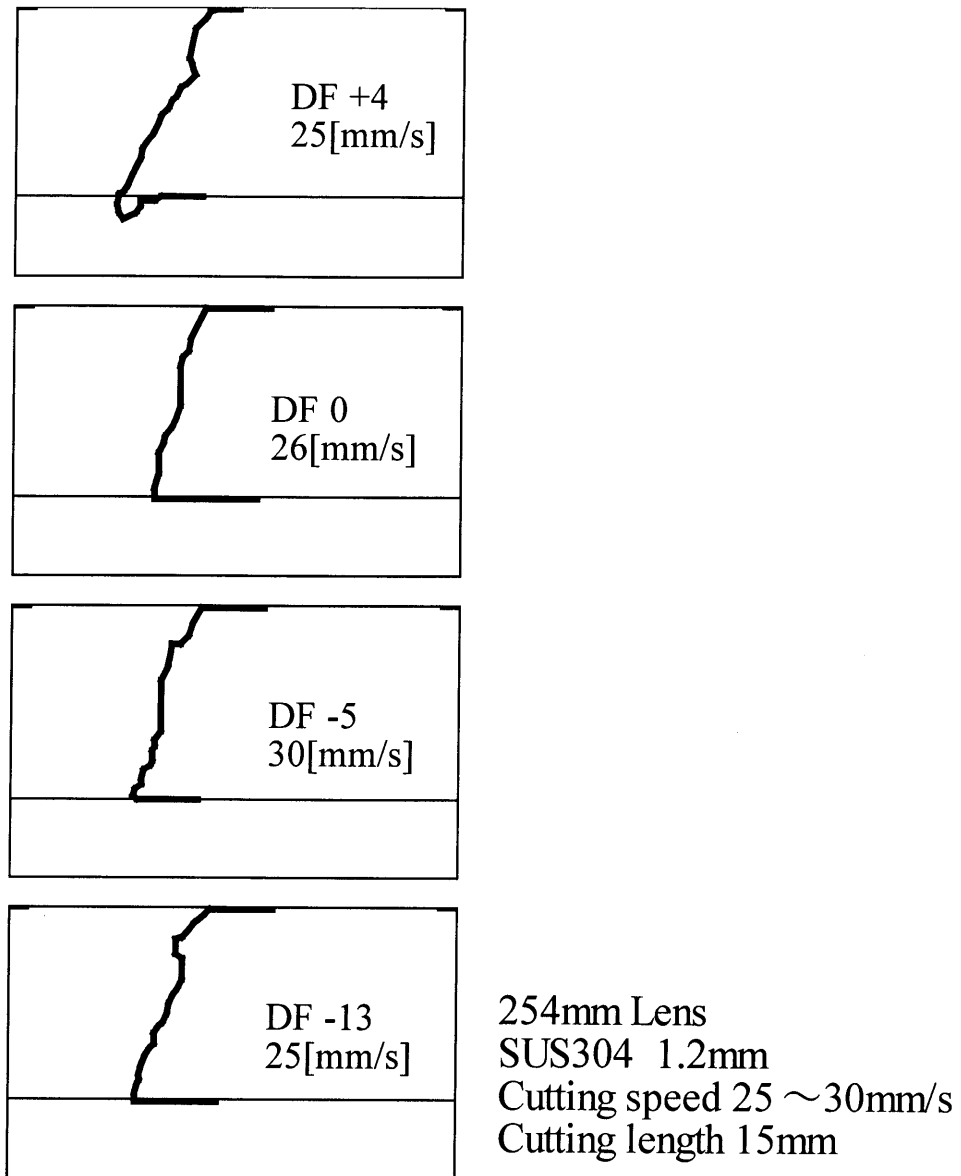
Shape of dragline at 15mm from piercing point
